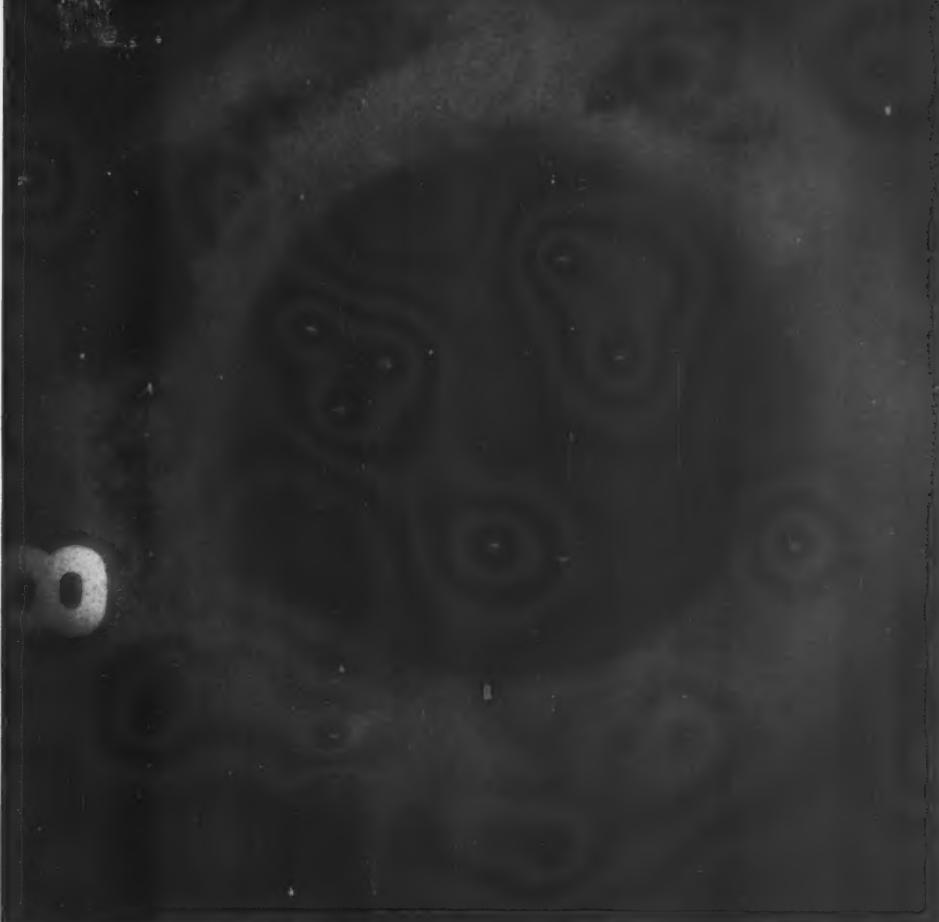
Above—Radiograph of casting showing shrinkage cavity resembling gas hole.
